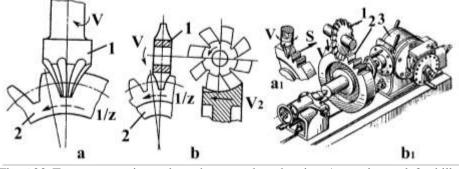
Form gear-cutting: a, b – scheme; a_1 , b_1 – drawing; 1 – cutting tool; 2 – billet; 3 – device for periodical turn of the billet on 1/z
